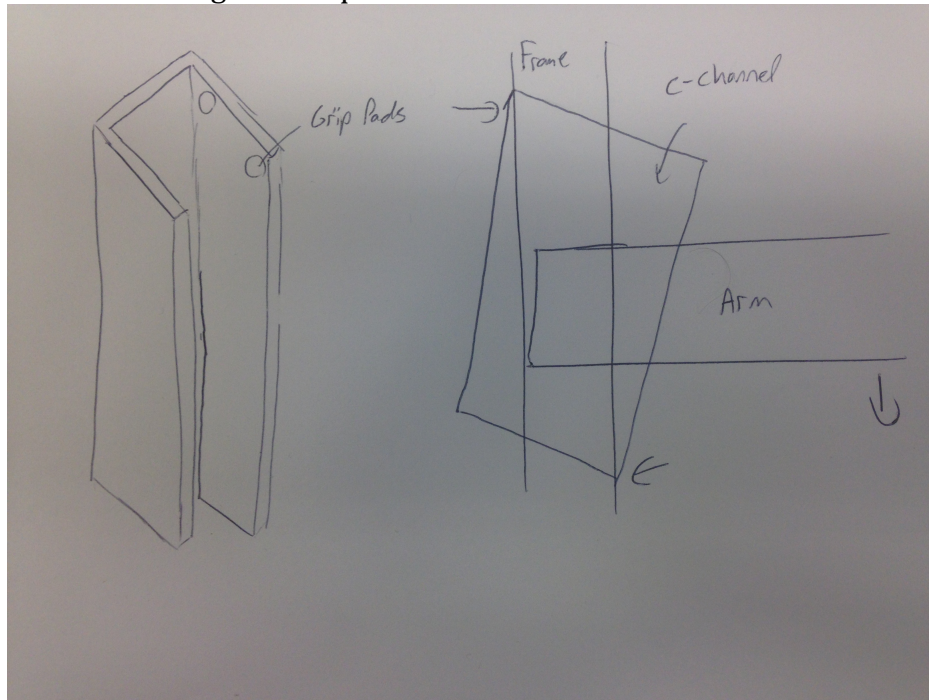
A drawing depicting a preliminary passive gripper design, utilizing a c-channel geometry. When torque is applied to the c-channel, a large normal force is applied at opposite corners, which can be used to hold the gripper up.
